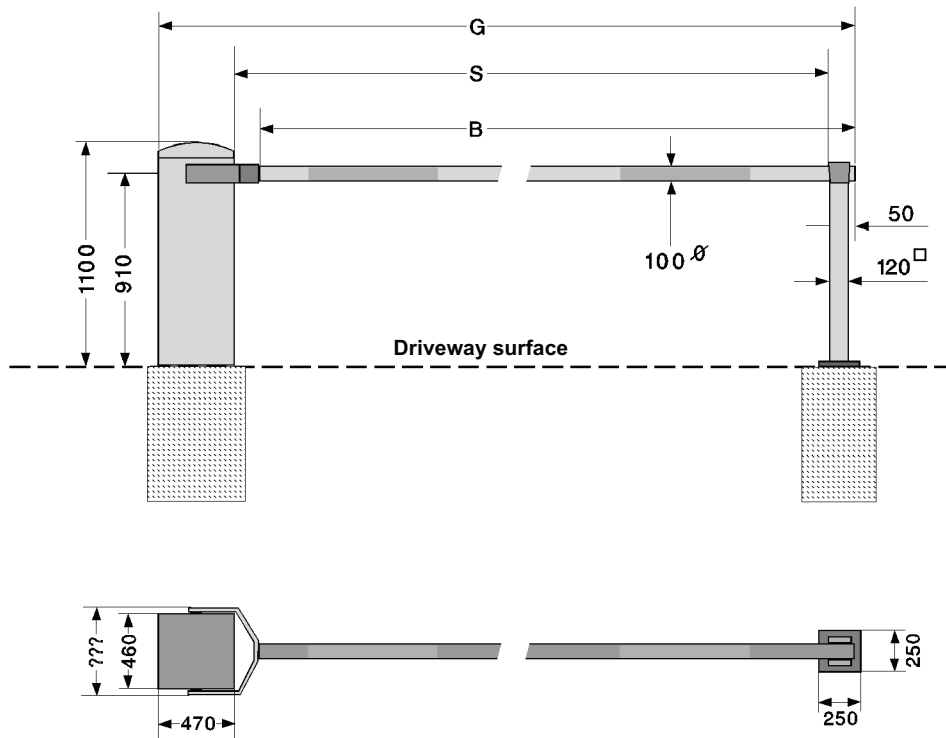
Dimensional drawing: electro-mechanical barrier GES 5 – 8 with fixed support post
